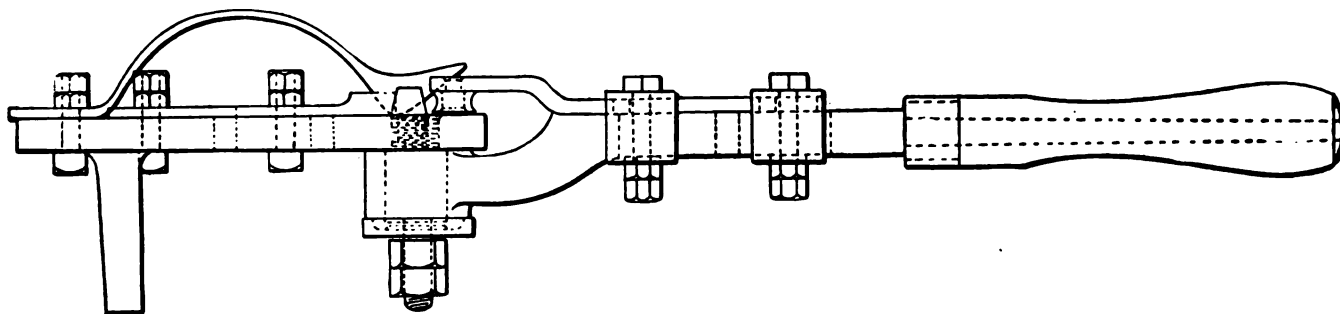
SIDE ELEVATION OF TOOL FOR BENDING EYE-BOLTS.
